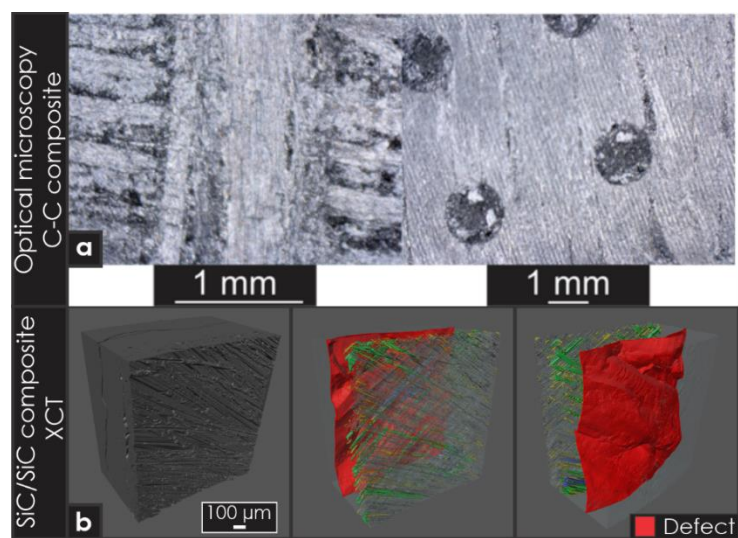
Defects introduced by machining in composites. (a) C/C composite surface damaged by machining detected by optical microscopy, (b) crack generated by machining in a SiC/SiC composite detected with x-ray computed tomography (XCT).
